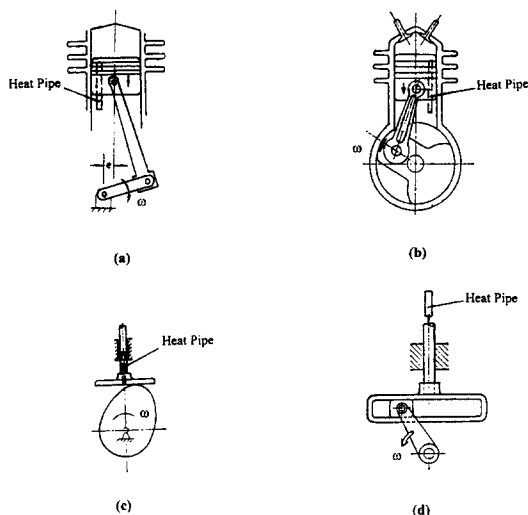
Application background of reciprocating heat pipes: (a) engine with offset slider–crank mechanism; (b) engine with on-center slider–crank mechanism; (c) cam-follower mechanism; (d) scotch yoke mechanism.
